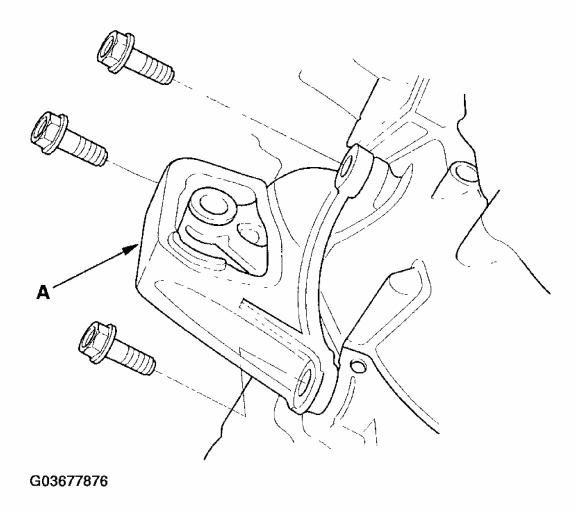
Removing Front Engine Mount Courtesy of AMERICAN HONDA MOTOR CO., INC.
